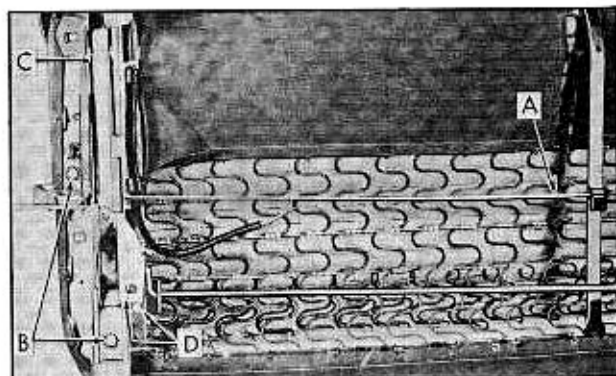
Removal of Seat Adjuster from Seat Assembly
